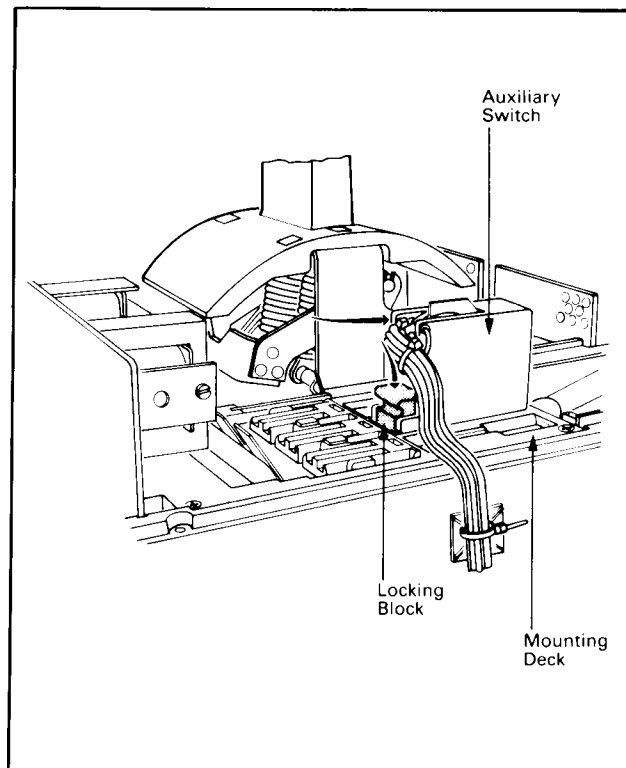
Auxiliary Switch Positioned and Locked in Mounting Deck
